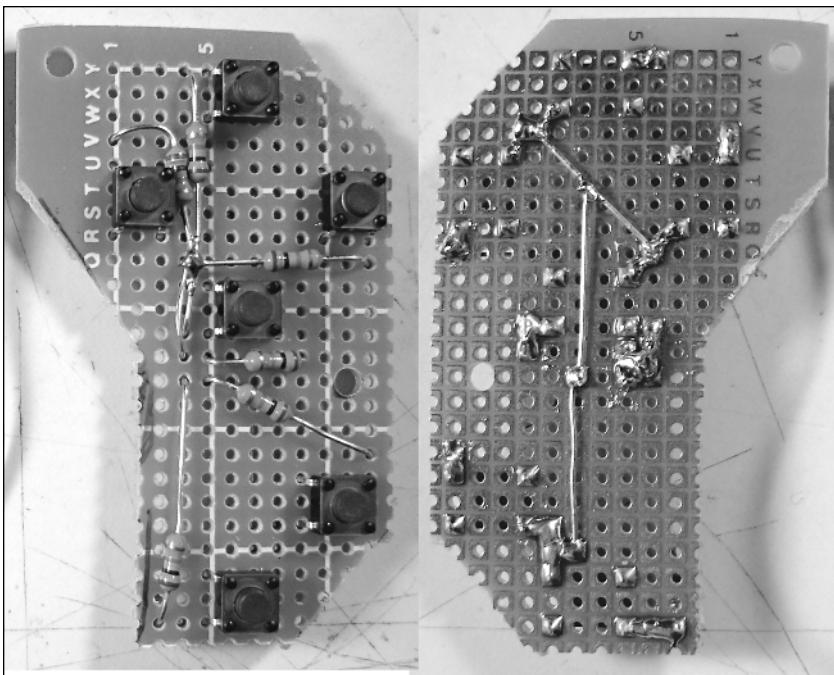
The front (left) and back (right) of the completed right PC board.
